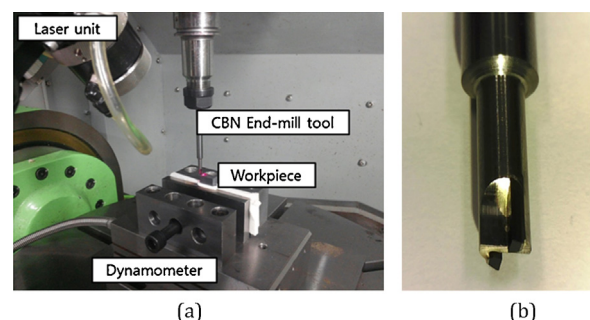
(a) The experimental setup and (b) end-mill tool shape.
